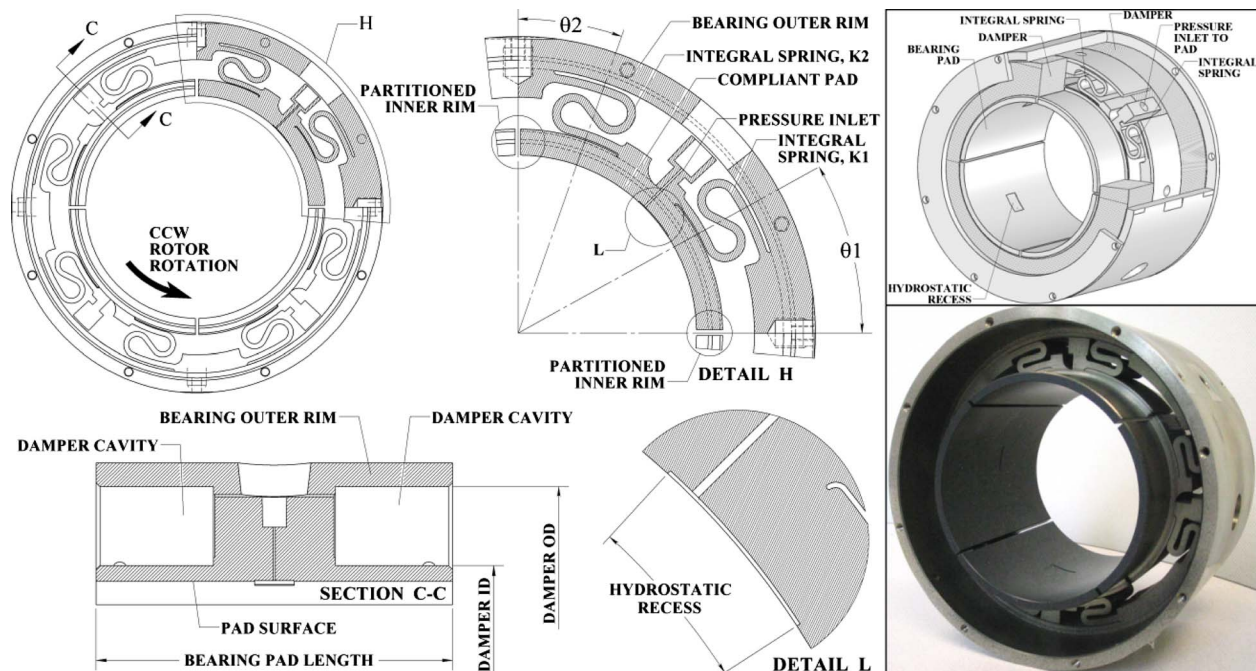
Compliant hybrid gas bearing using integral wire mesh bearing support dampers [6]
